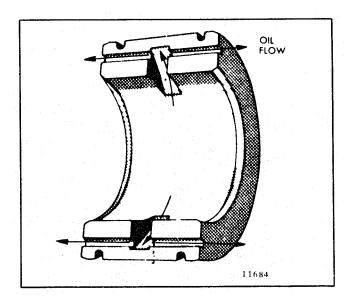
Camshaft Intermediate Bearing (Lower Half)
